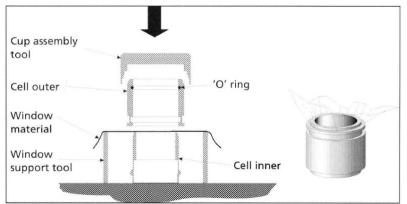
Sample cup assembly using cup assembly tool (Part no. LX1054) The window assembly tool is also used to dismantle the cell.
